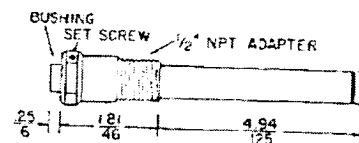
Part No. WEL14A-600R bulb well for liquid immersion applications where the temperature bulb may be removed without draining the tank.
